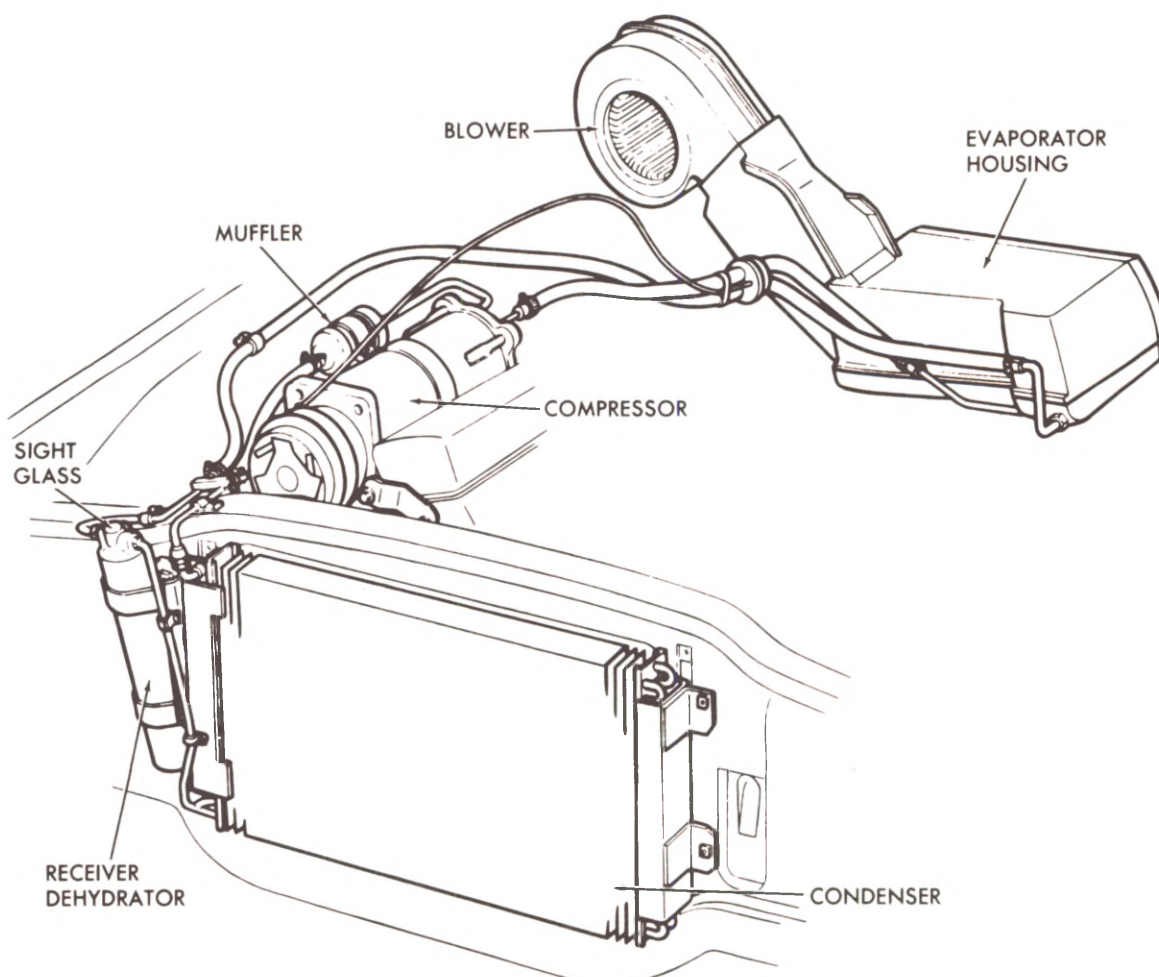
Typical "Cycling Clutch" System with Thermostatic Expansion Valve
